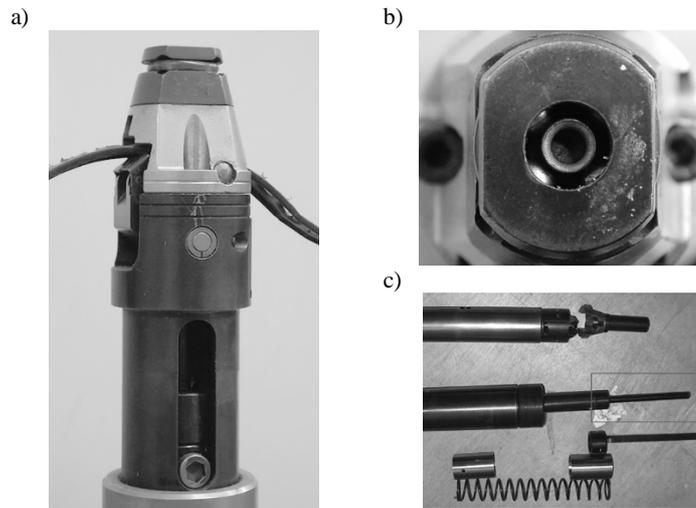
SPR tool housing: a) punch head, b) blank holder face, c) tool head elements (punch highlighted in the box)
